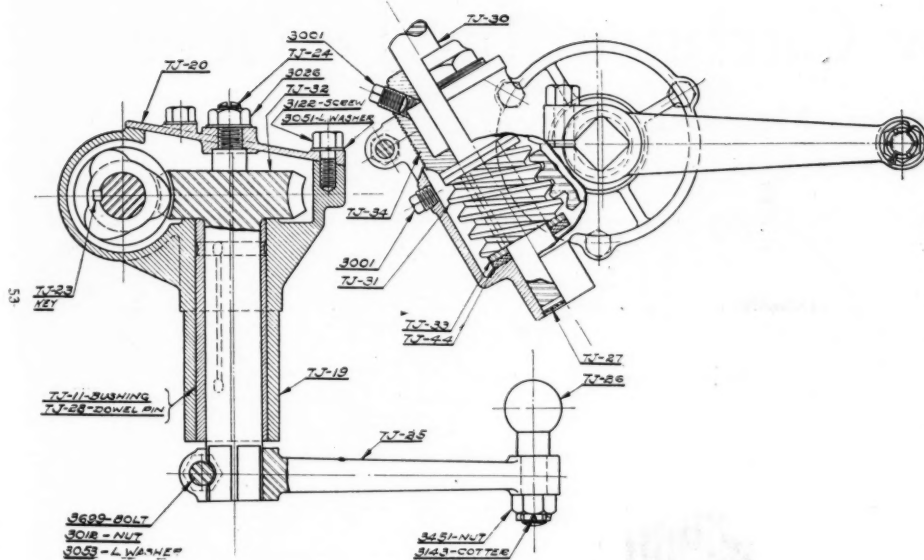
Sectional view of steering gear similar to that used on Crow-Elkhart
